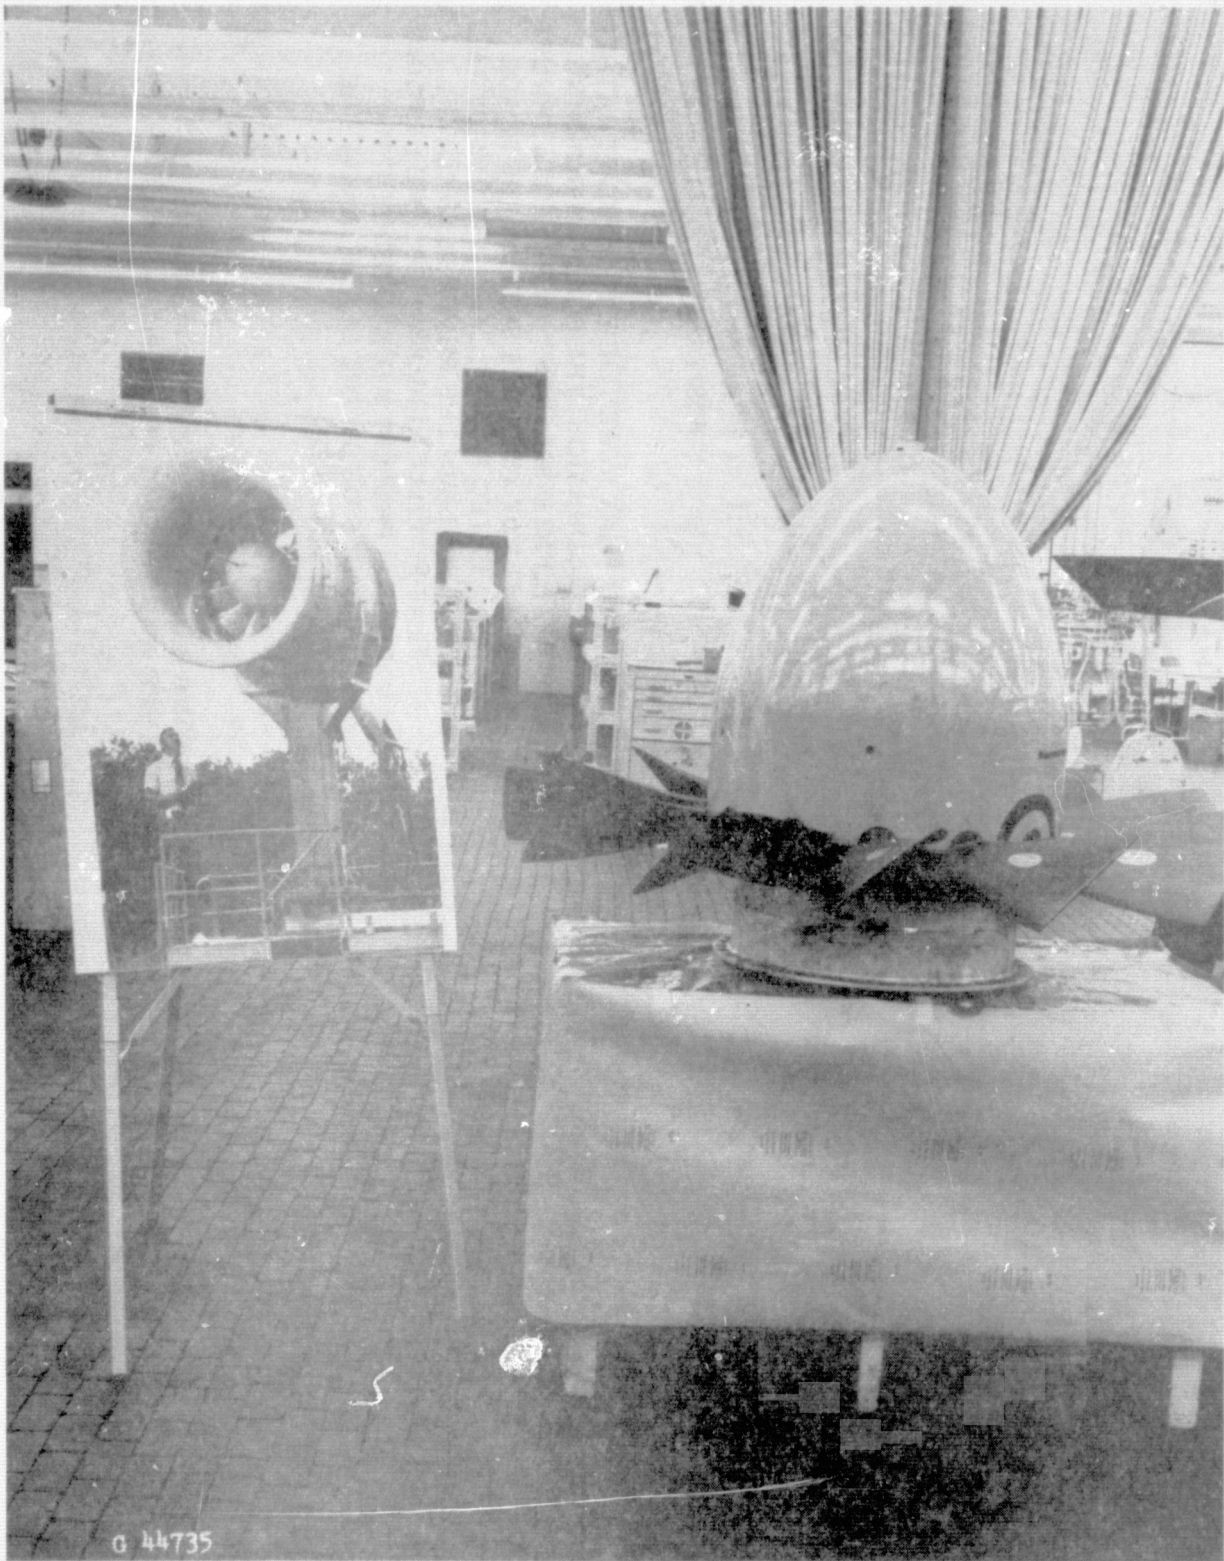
FAN ASSEMBLY WITH SPINNER INSTALLED
